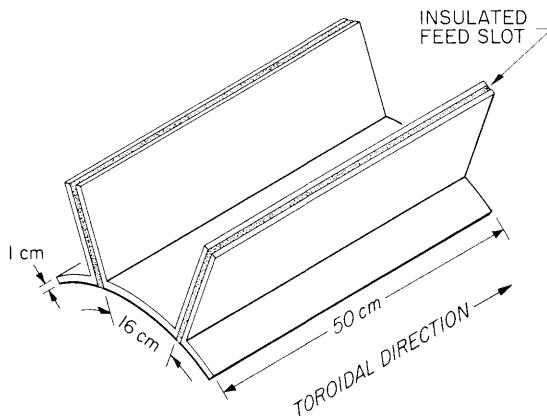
Dimensions and geometry of one section of the first wall.
